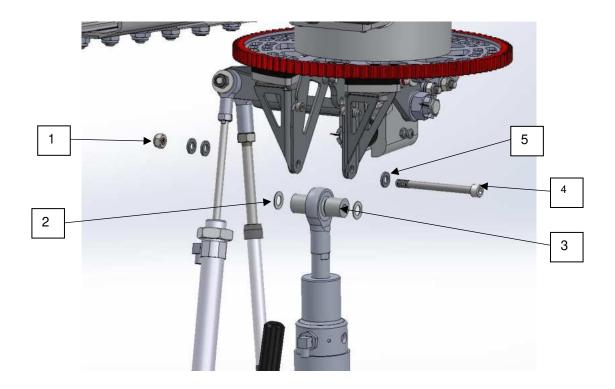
Correct order of the parts to re-install pneumatic cylinder
